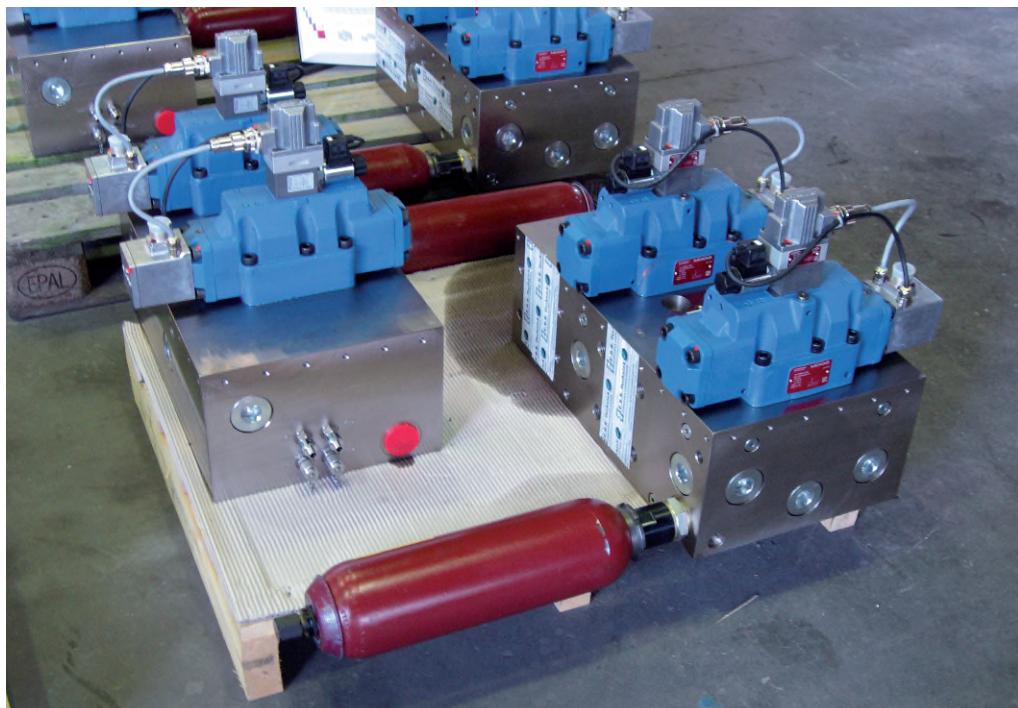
B Two of the six hydraulic control manifolds during assembly, clearly shown is the dual servovalve arrangement
